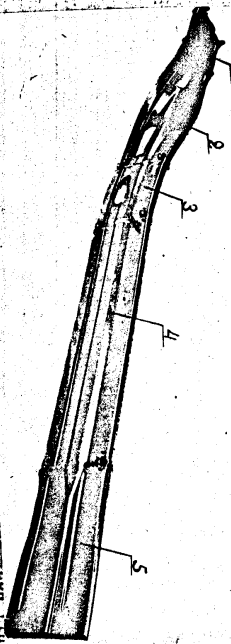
Flexible chute end section of the aircraft ammunition feed line: 1 - ammunition box end section; 2 - twisted section; 3 - intermediate section; 4 - straight section; 5 - flexible chute end section.
